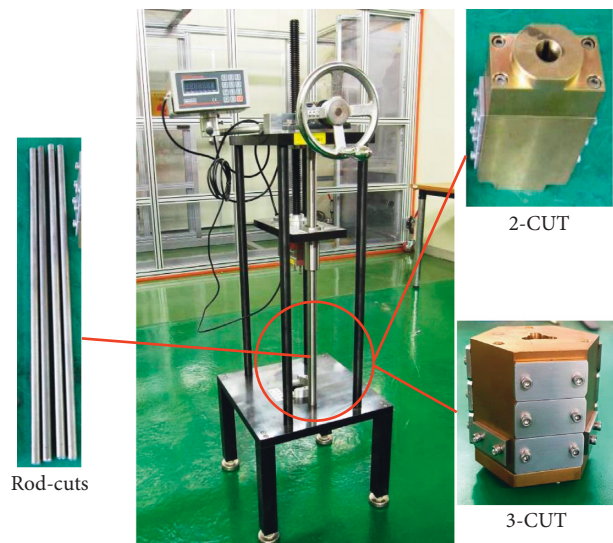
Slitter, 2-CUT and 3-CUT modules, and rod-cuts for slitting test.
